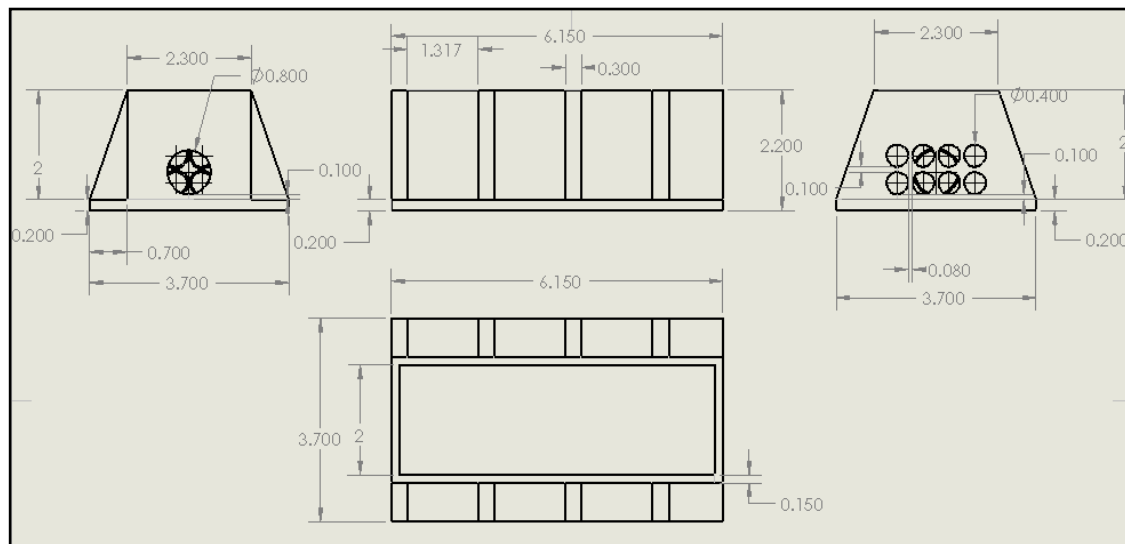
Double Tank Rectangular Design 2D view (Tank 2)
